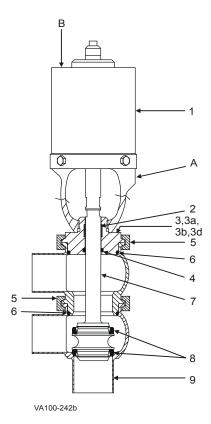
W62/W82 Divert Valve (Air-to-Raise Shown)
